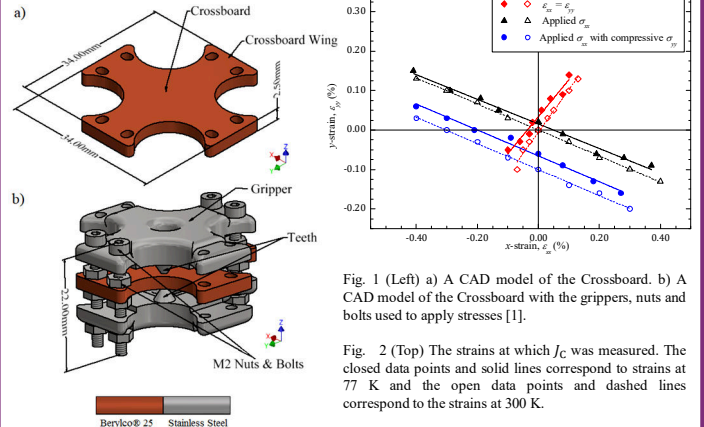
(Left) a) A CAD model of the Crossboard. b) A CAD model of the Crossboard with the grippers, nuts and bolts used to apply stresses [1].
